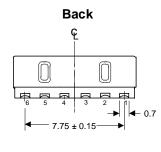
and Figure 5 show the mechanical drawings for the ZHX1000 and ZHX1010, respectively.
